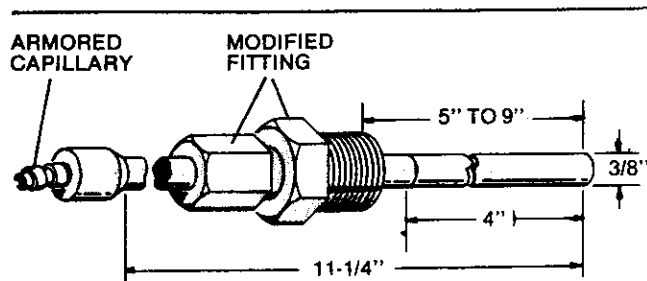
shows the 3/8" O.D. Rigid Bulb dimensions and the modified fitting used.
